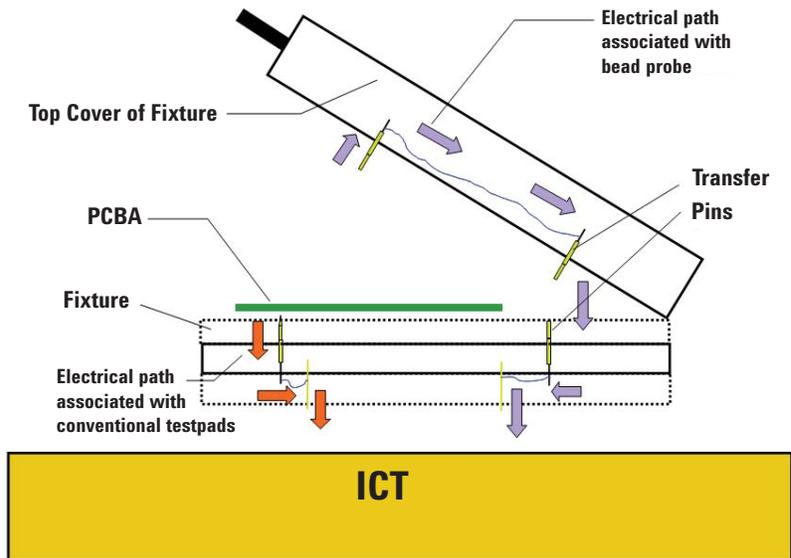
Electrical path associated with the bead probe locations and conventional test pads
